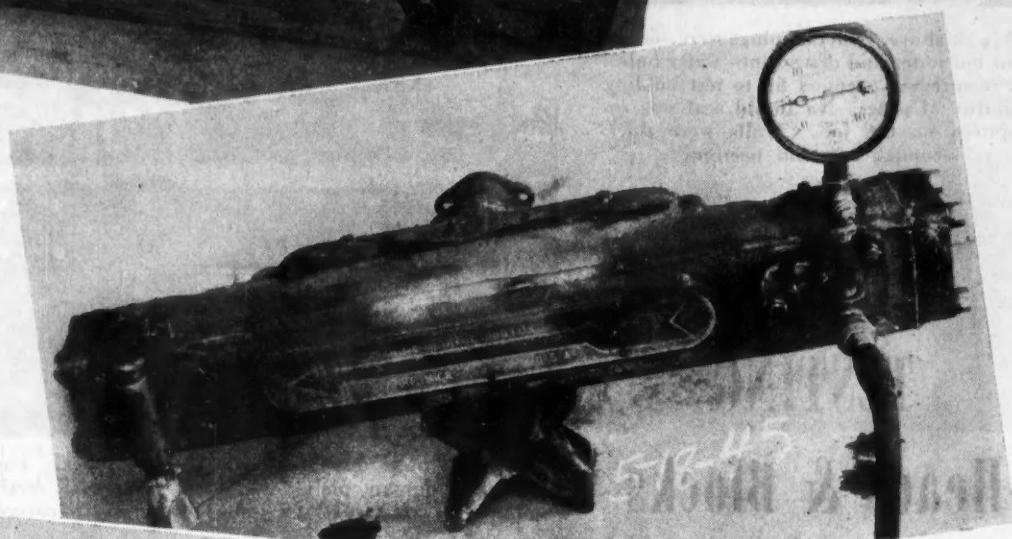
, above. After welding, the manifold was checked with the regulated pressure water test. A 4-lb. pressure test is sufficient for testing units of this type
